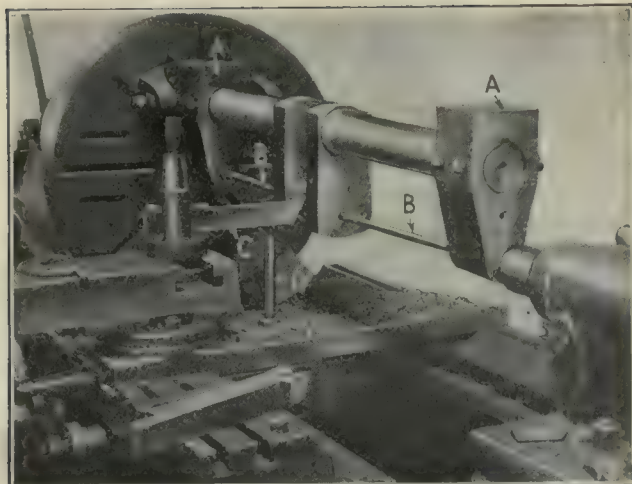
TURNING CRANKPIN BEARINGS OF LARGE CRANKSHAFTS
